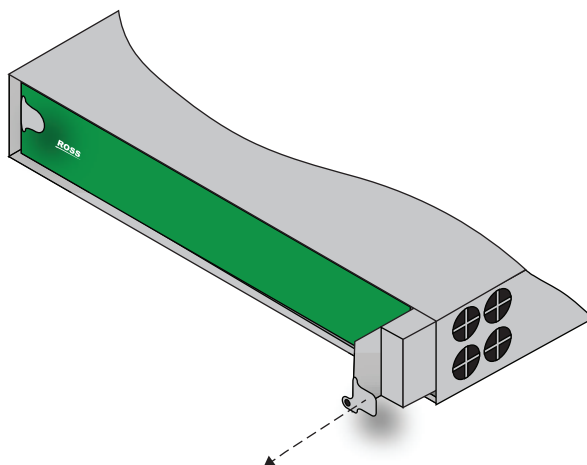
ULTRIX-FR2(-NS) — Removing the Cooling Fan Module from the Chassis
